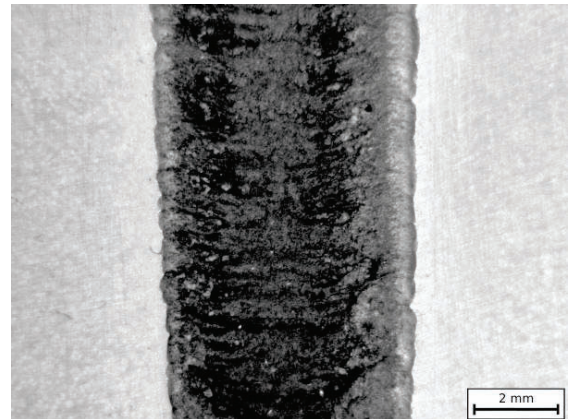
View of the MCMgAl9Zn1 cast magnesium alloy face weld after laser treatment with NbC, scan rate: 0.25 [m/min], laser power: 2.0 [kW]
